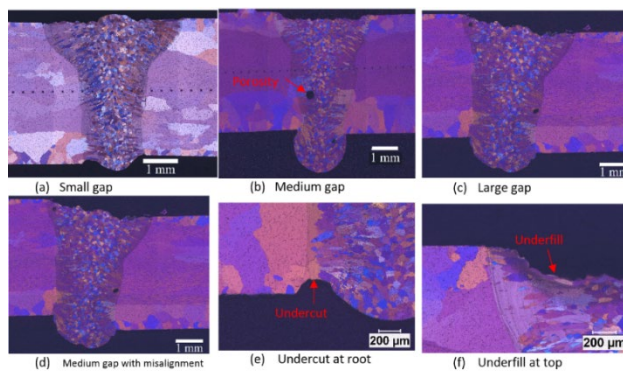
(a-c) Weld transverse sections for small gap, medium gap, large gap and medium gap with misalignment respectively, (d-f) weld defects
